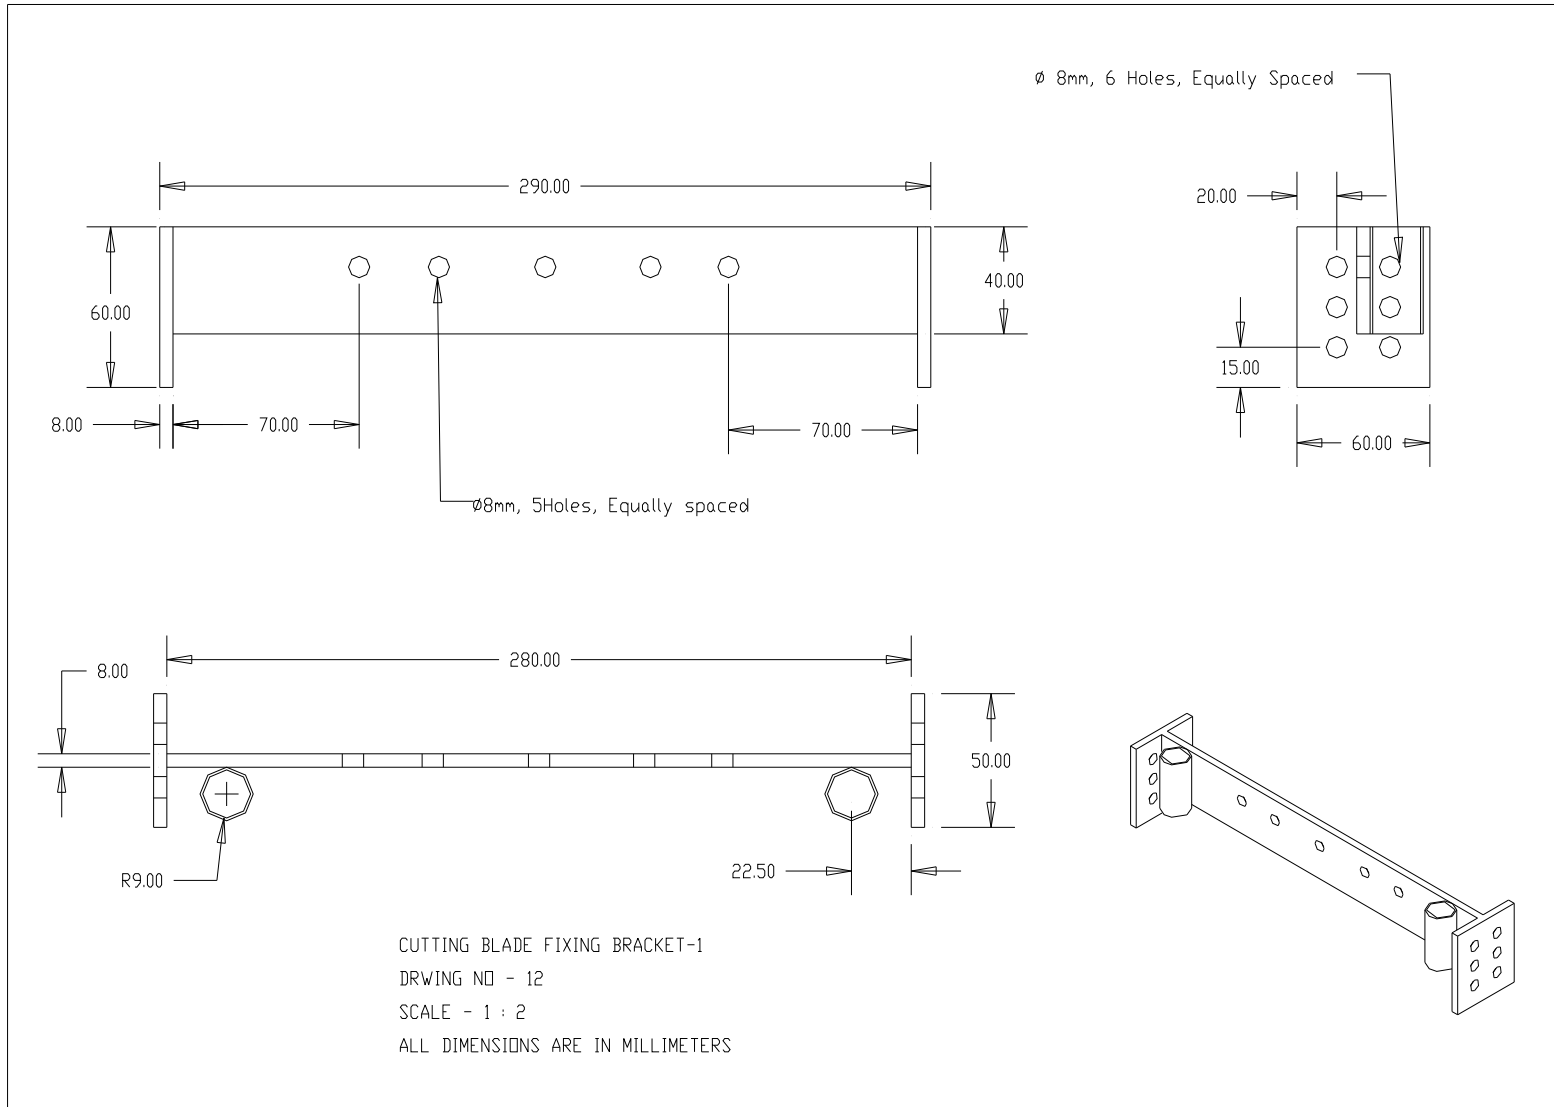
Detailed drawing of cutting blade fixing bracket-1
